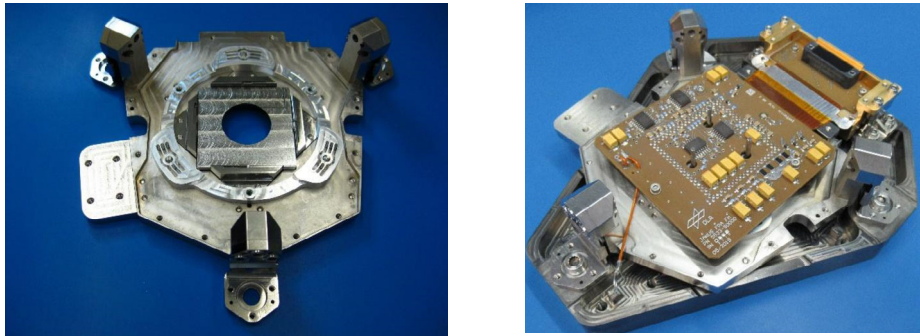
Left: FPM PCB Flex-mount ring and detector cooling plate made of Molybdenum. Right: FPM detector PCB mounted on flex-mount ring
